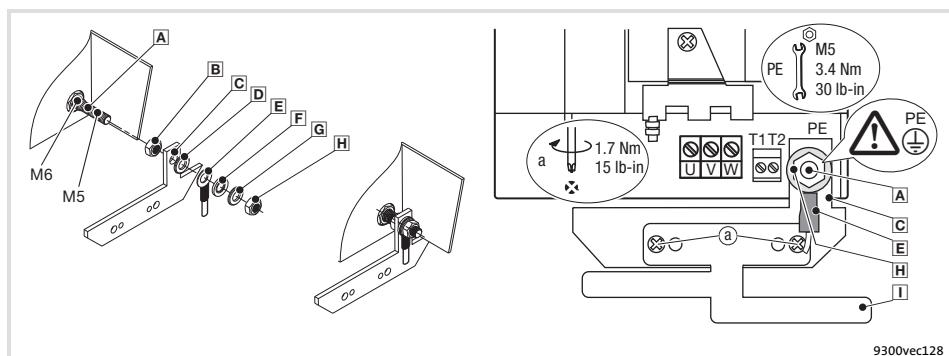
Installation of shield sheet for drive controllers 0.37 ... 11 kW
